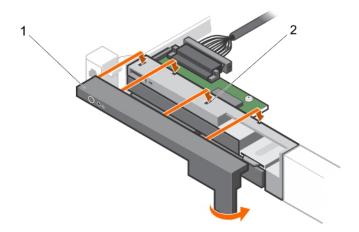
Installing the control panel—eight 2.5-inch hard drive chassis
